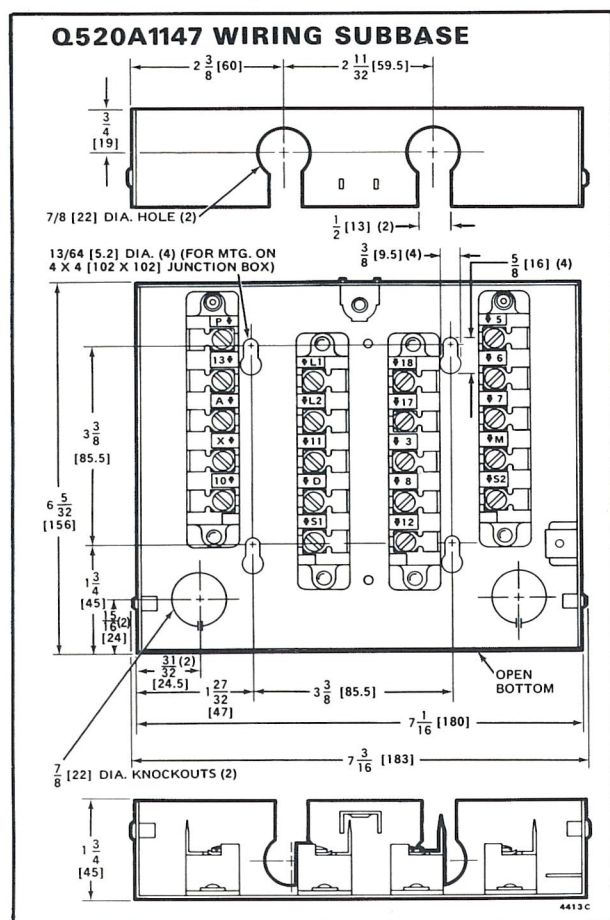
Mounting dimensions of the Q520A1147 Wiring Subbase, in inches [millimetres shown in brackets].
